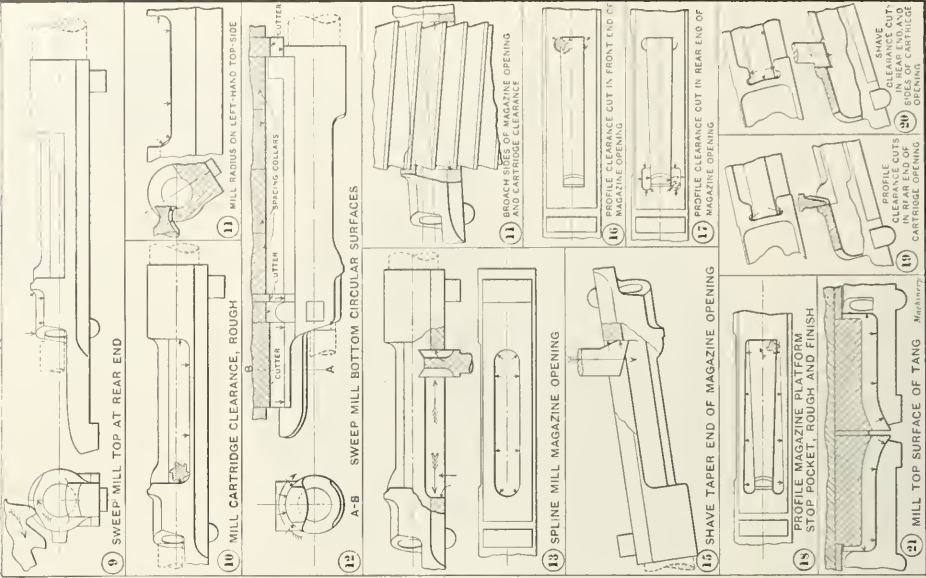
Machining Operations on Spanish Mauser Receiver (Continued)
